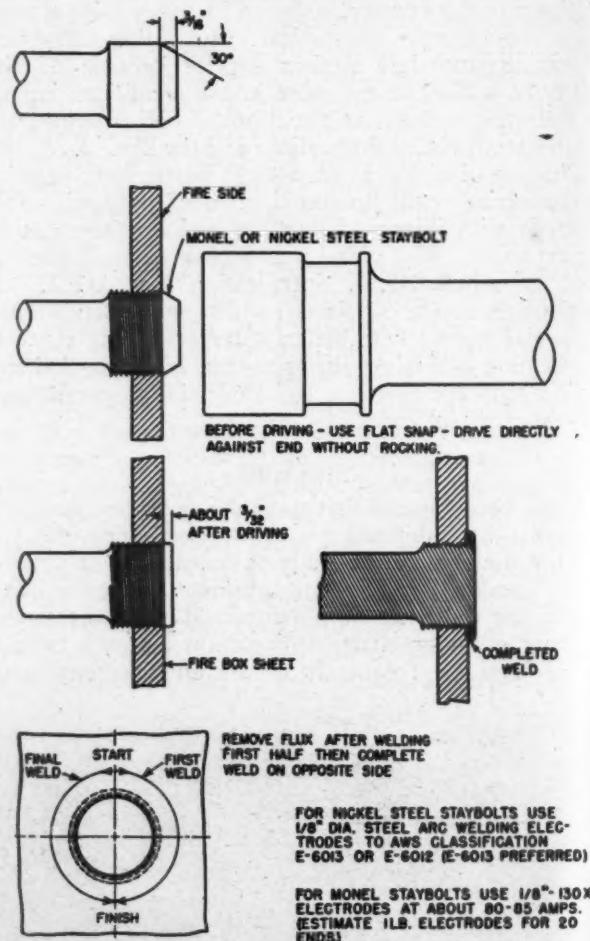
Recommended procedure for seal welding staybolts on the fire side
